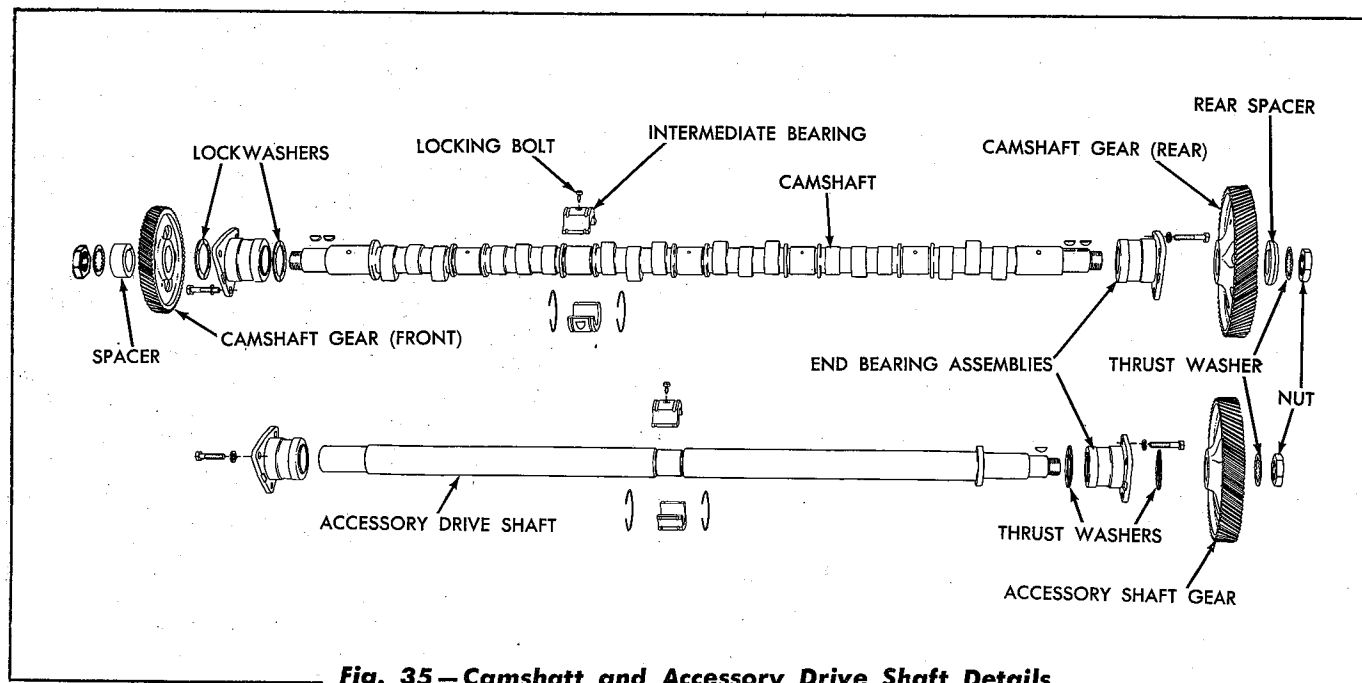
Camshaft and Accessory Drive Shaft Details
